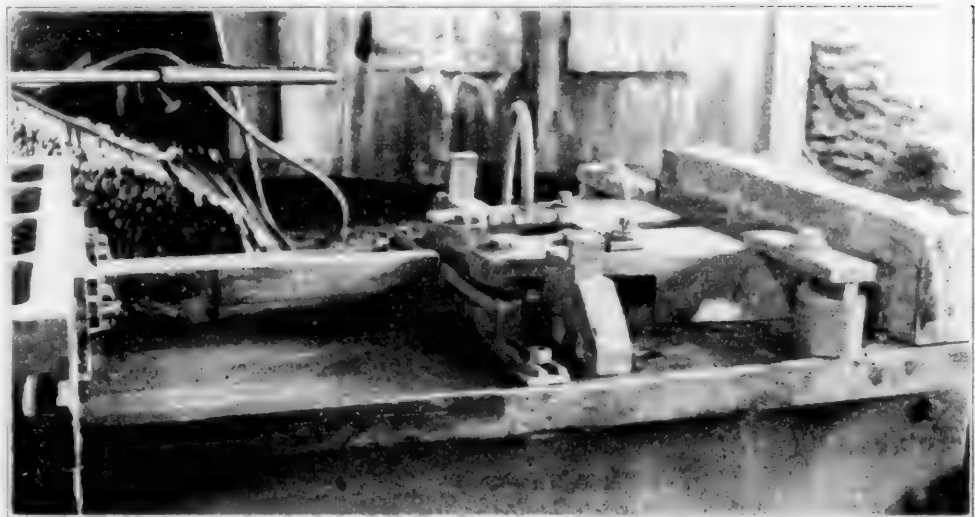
BRAKE SHOE KEY FORGING DEVICE ON BULLDOZER.
